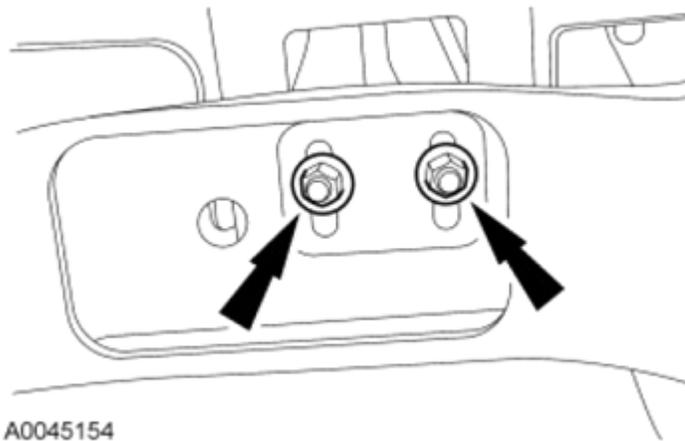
Locating Transmission Mount-To-Crossmember Nuts
